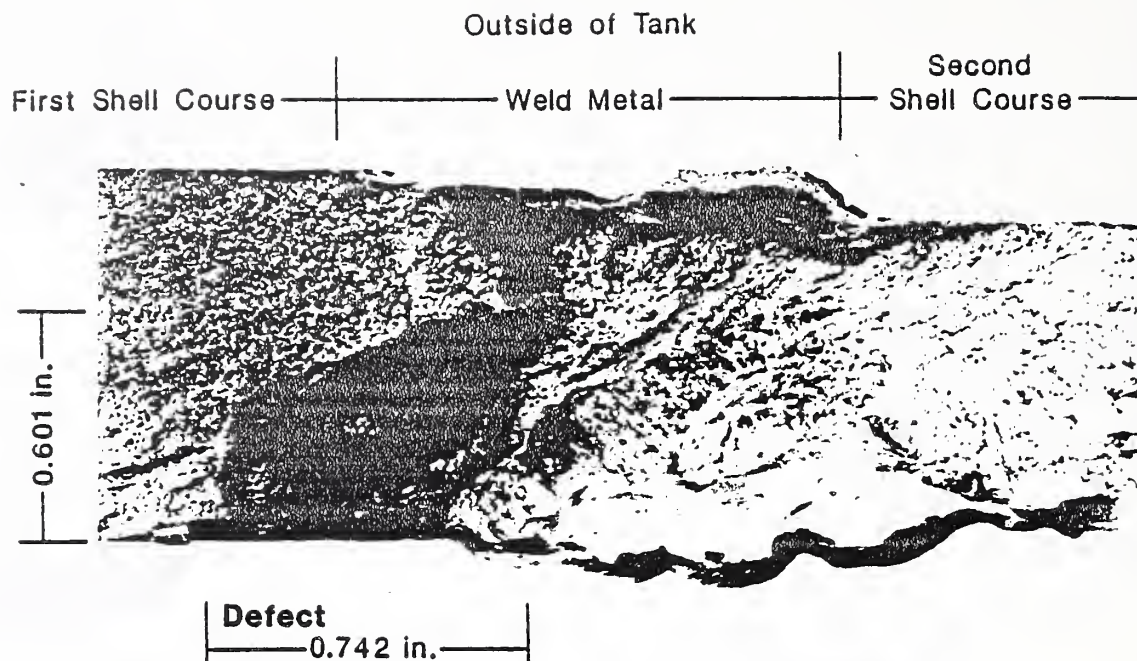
Defect on Fracture Surface from which Tank Failure Originated.
